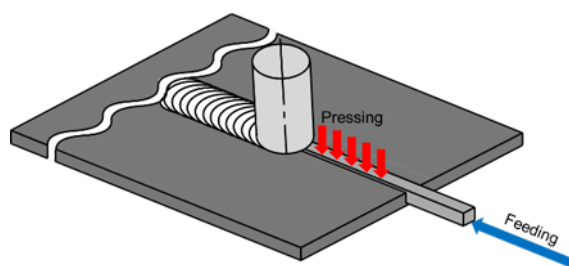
Schematic diagram of build-up friction stir welding.
